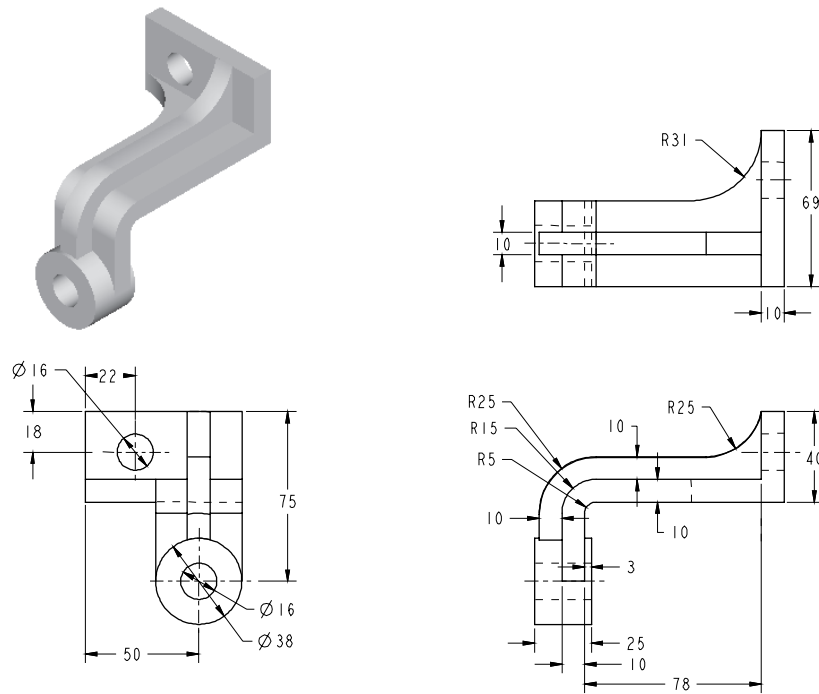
Isometric shaded view, left-side, front, and top views of the model
